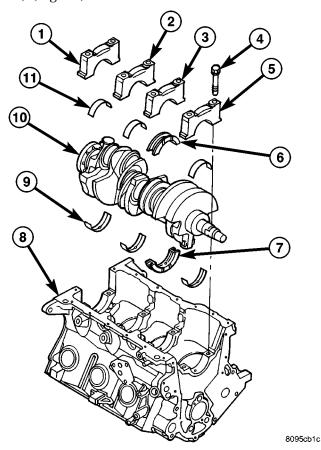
CRANKSHAFT AND BLOCK - 3.3L
